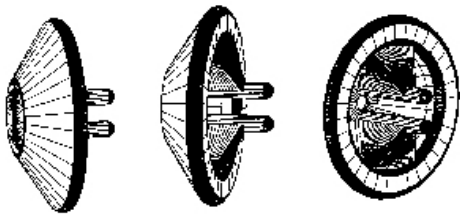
Several Views of an RFD Half Drift Tube Body.
